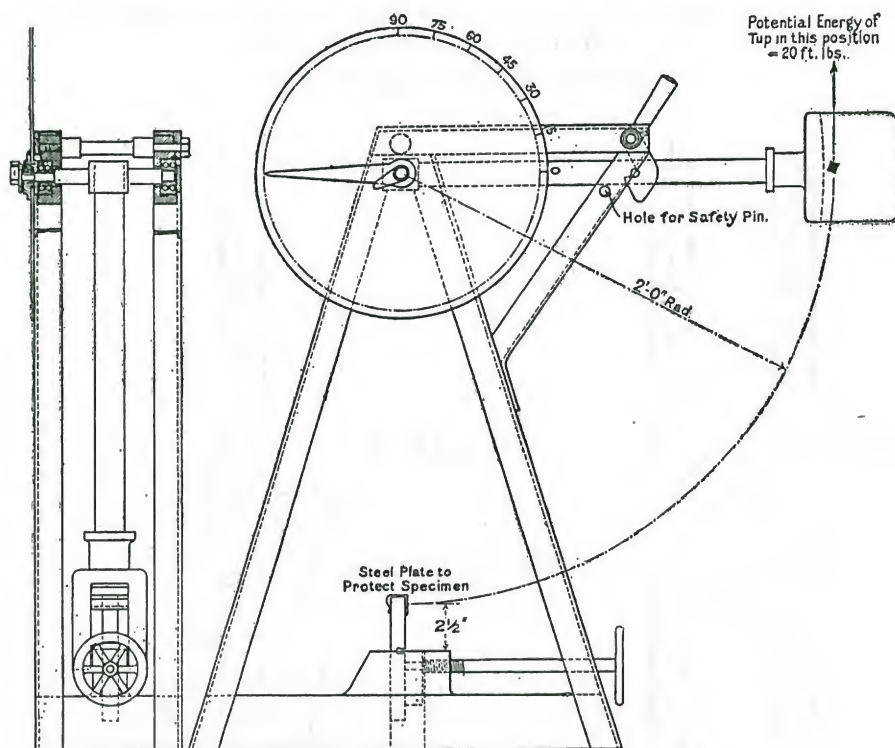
SIDE AND END ELEVATIONS OF IMPACT TESTING MACHINE
